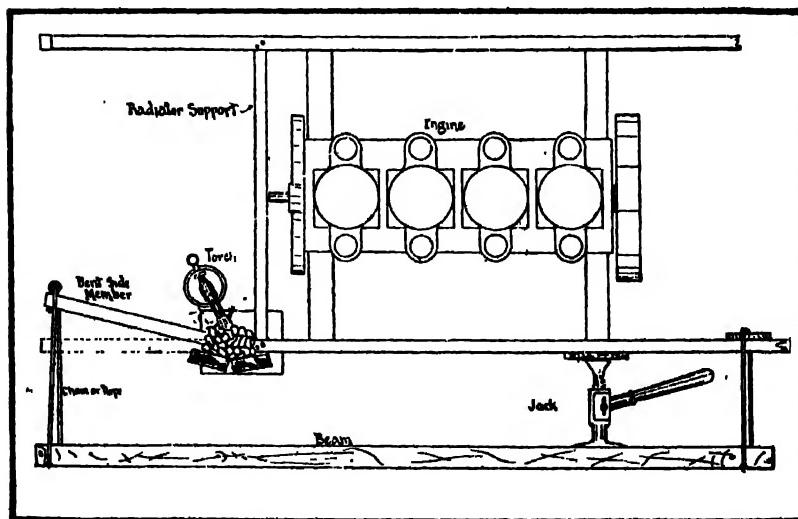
Showing Method of Straightening Bent Frame Side Member.
